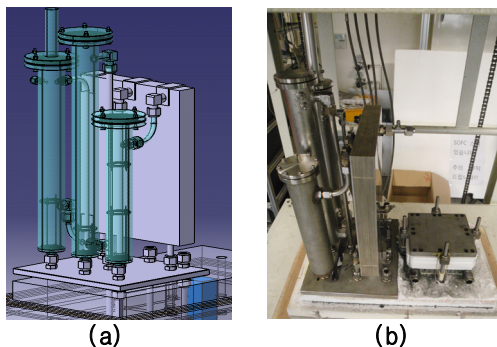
(a) Drawing and (b) manufacture of 1kW_e SOFC system
